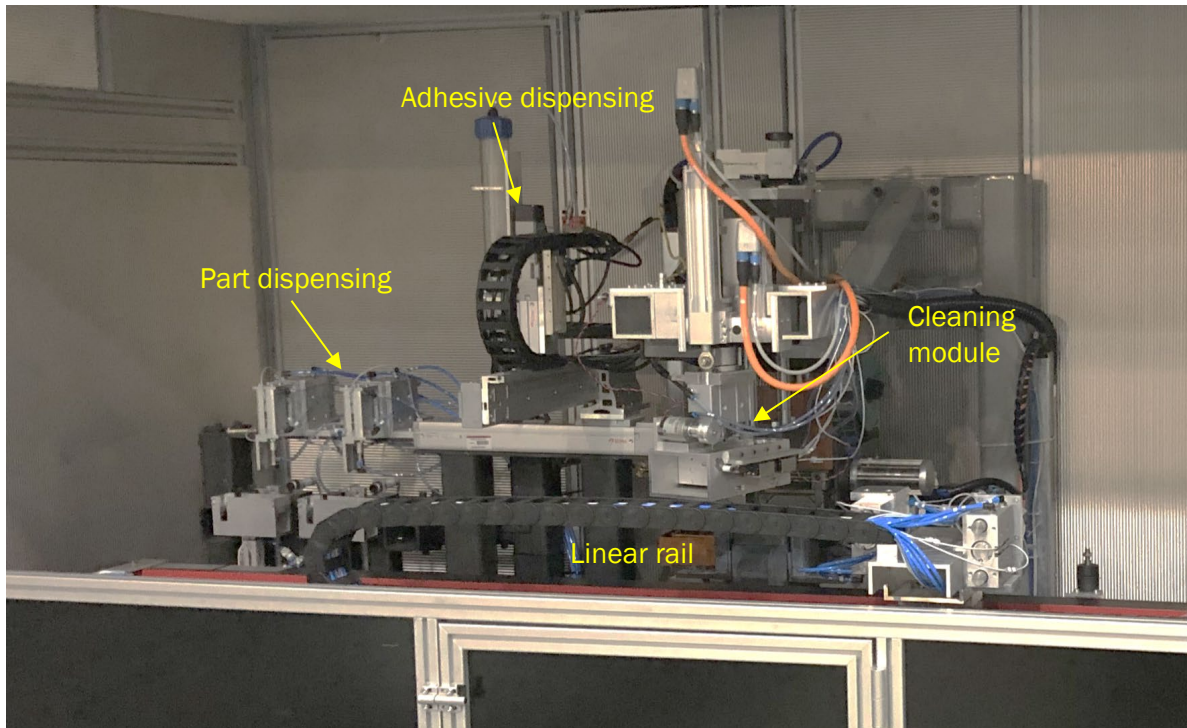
Pedestal welder with automated part handling, adhesive dispense, and cleaning.
